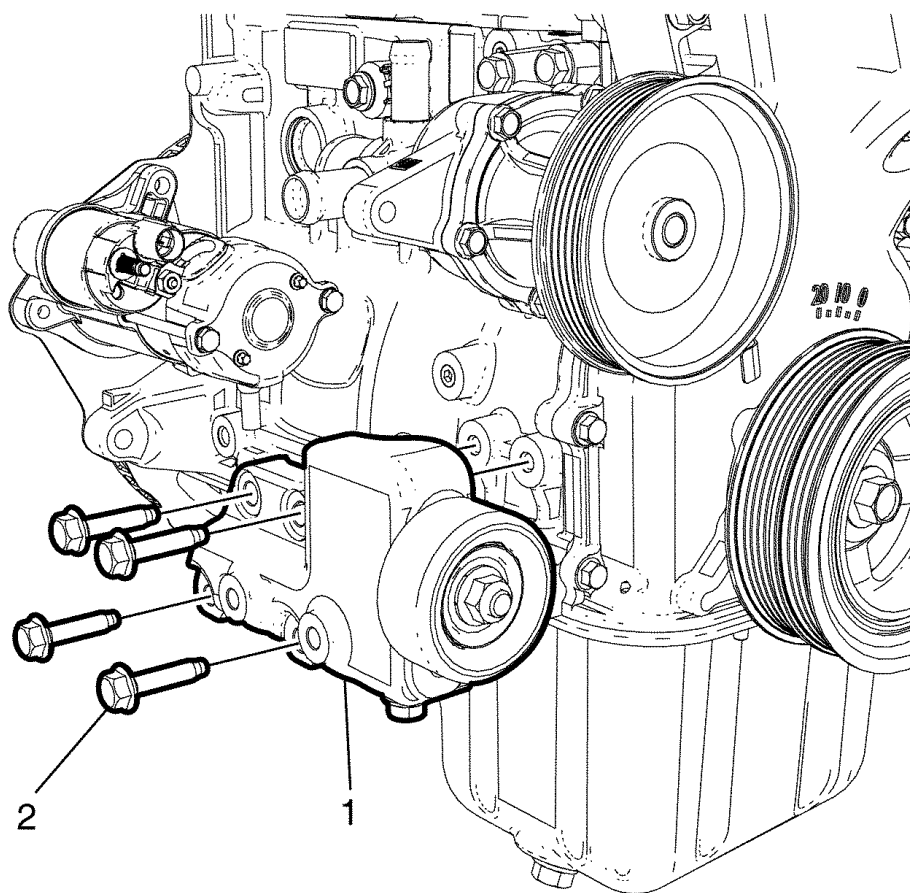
Generator Bracket Retaining Bolts And Bracket
